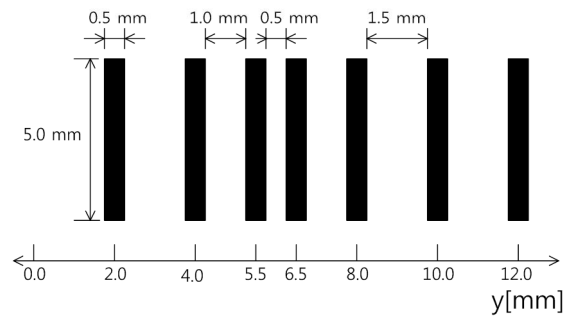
Layout of a PCB with seven strips with width of 0.5 mm
